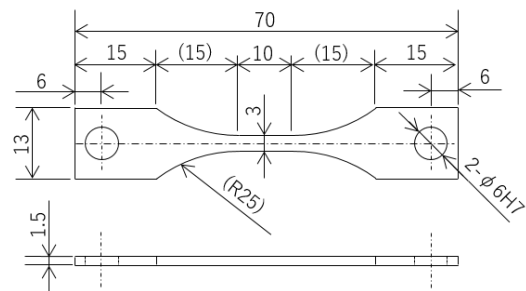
Specimen Shape and Size (Dimensions in mm)
